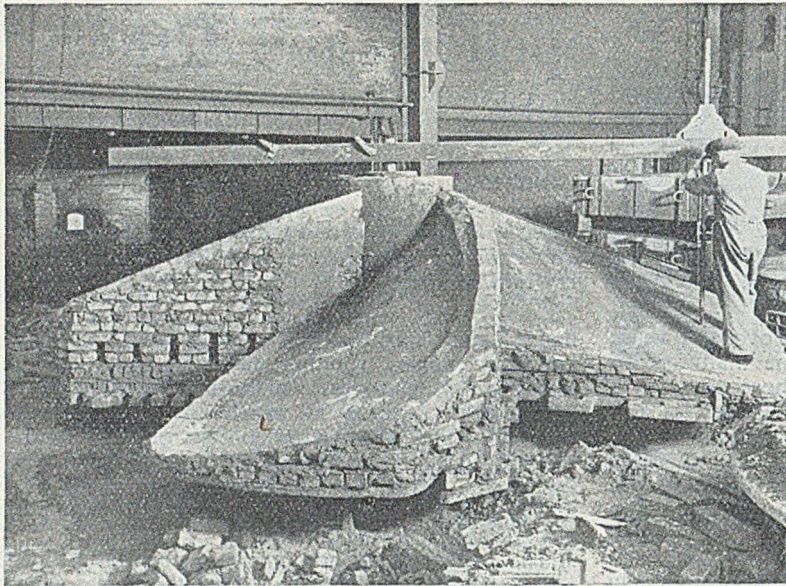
Loam Drag Part for an 18-ton Propeller; the Craftsman is Checking the Pitch of a Blade.
